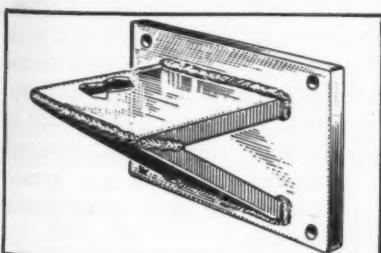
For heavy loading, the cantilever arm is made from channels flame-cut to shape and welded.
